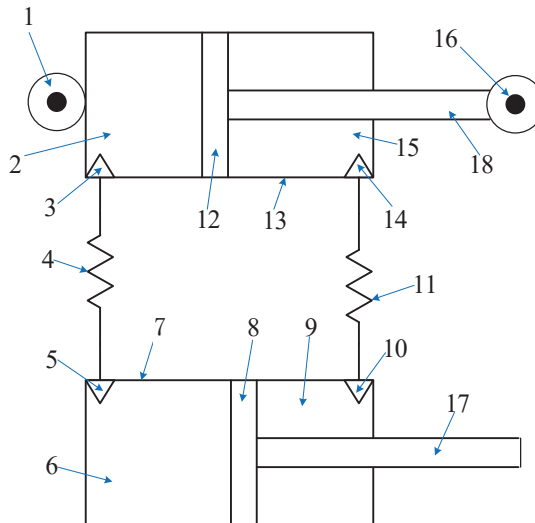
Schematic drawing of dual-cylinder fluid inerter. 1—terminal; 2—main chamber; 3—oil port; 4—pipeline; 5—oil port; 6—main chamber; 7—cylinder; 8—piston; 9—annular chamber; 10—oil port; 11—pipeline; 12—piston; 13—cylinder; 14—oil port; 15—annular chamber; 16—terminal; 17—piston rod; 18—piston rod.
